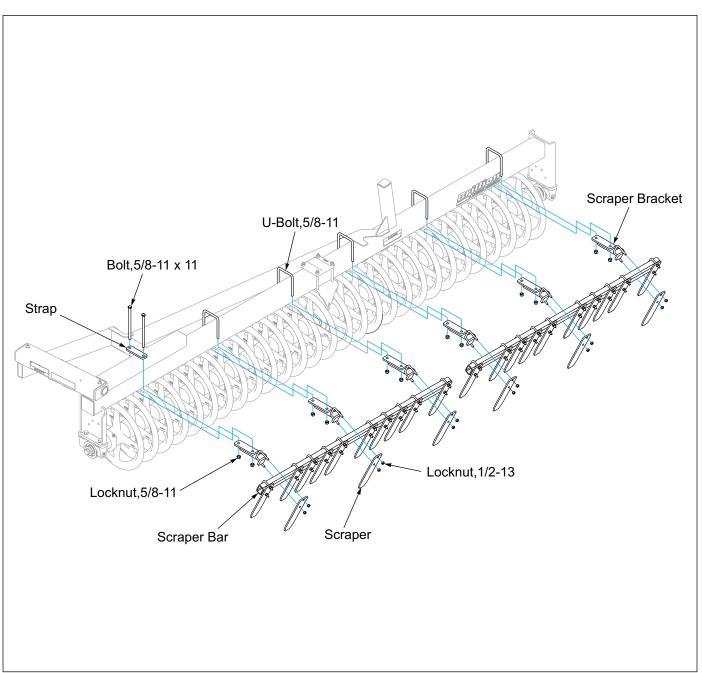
Wing V-Wheel Scraper Installation - Optional - 2 Bar
